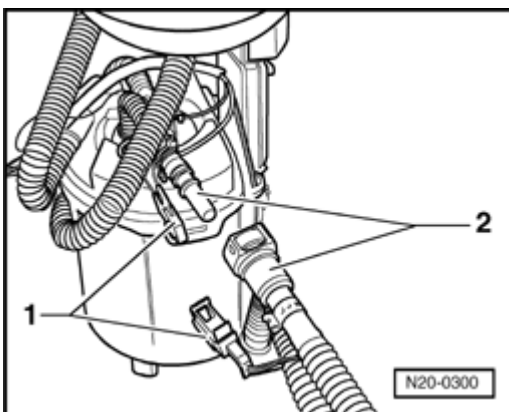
Identifying 2-Pin Connection, Such As Supply Line Hose Connection To Suction Jet Pump
